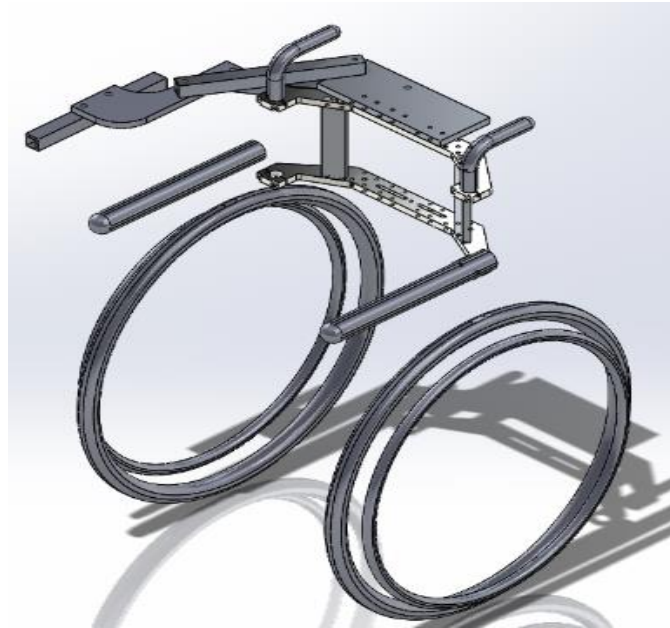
Isometric view of Zach's Solidworks CAD model
